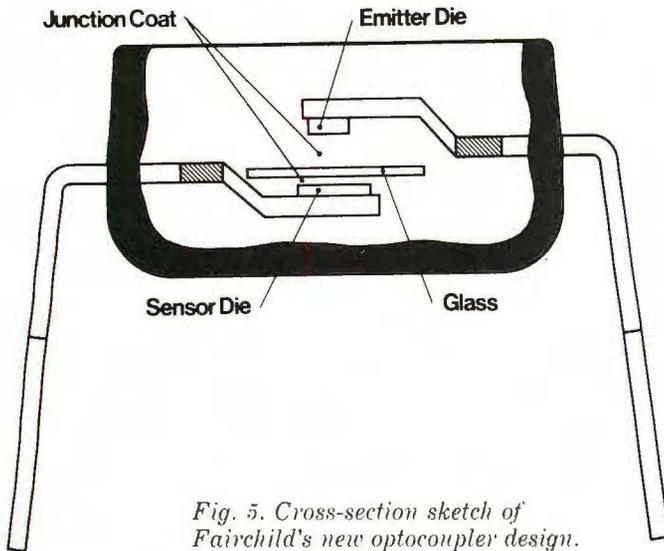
Cross-section sketch of Fairchild's new optocoupler design.
